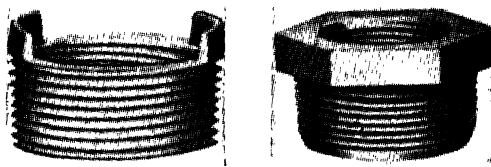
Select a bushing that gives a good strong pipe joint. (Courtesy of Crane Co.)
